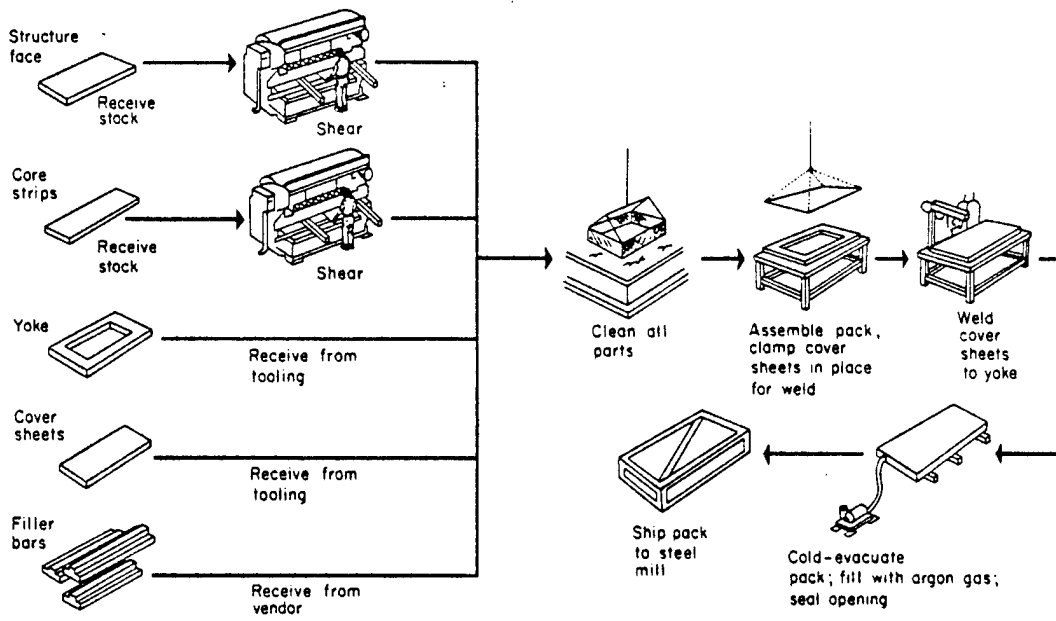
Assembling Pack for Roll-Diffusion Bonding⁽²⁷⁾
